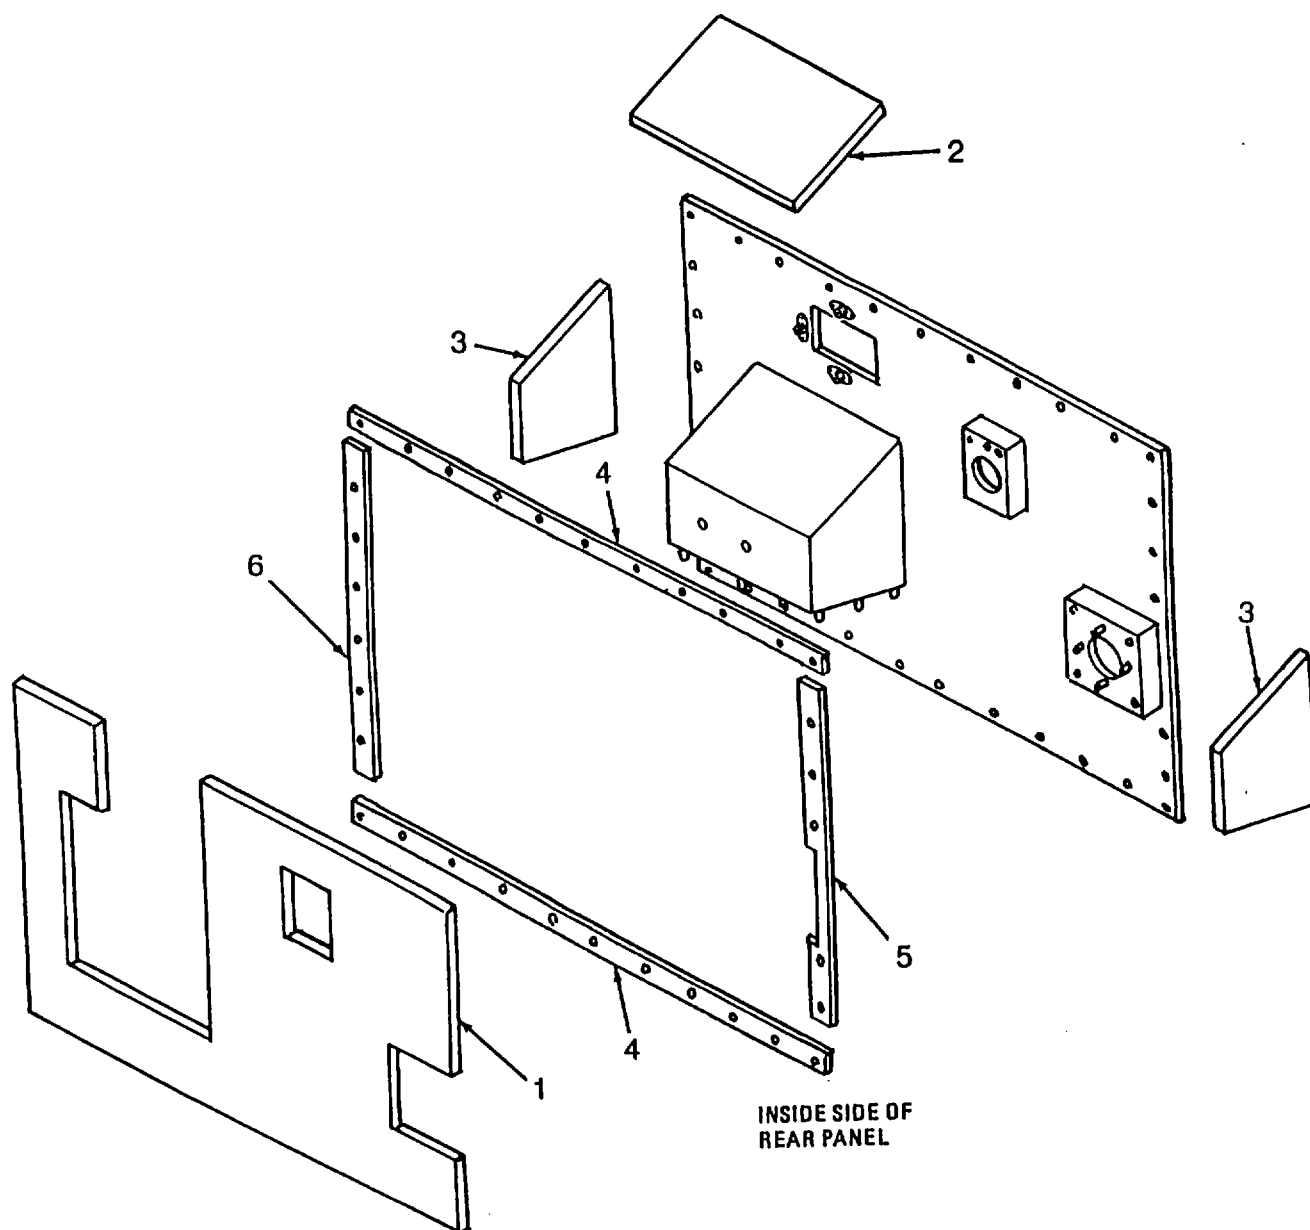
Rear Panel Assembly (Sheet 1 of 3)
